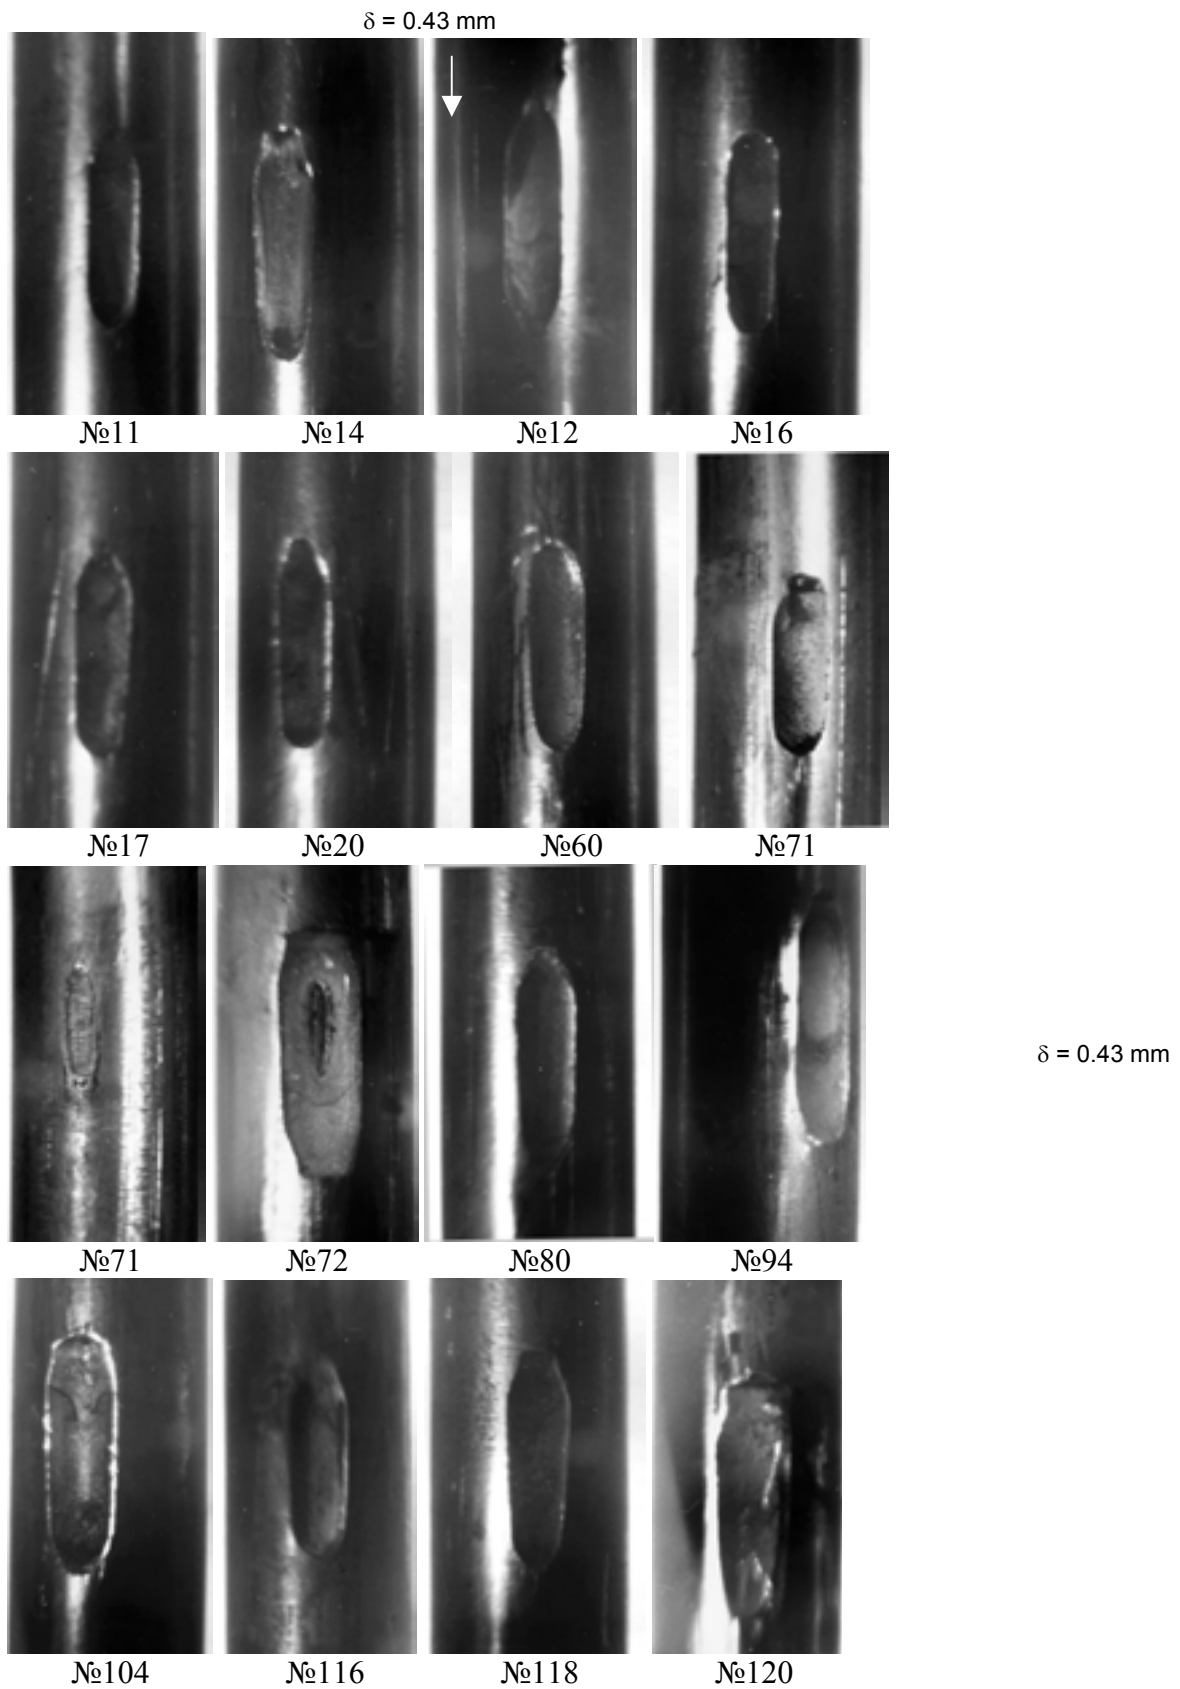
Visual appearance of cladding fretting at the places of contact with spacer grids
